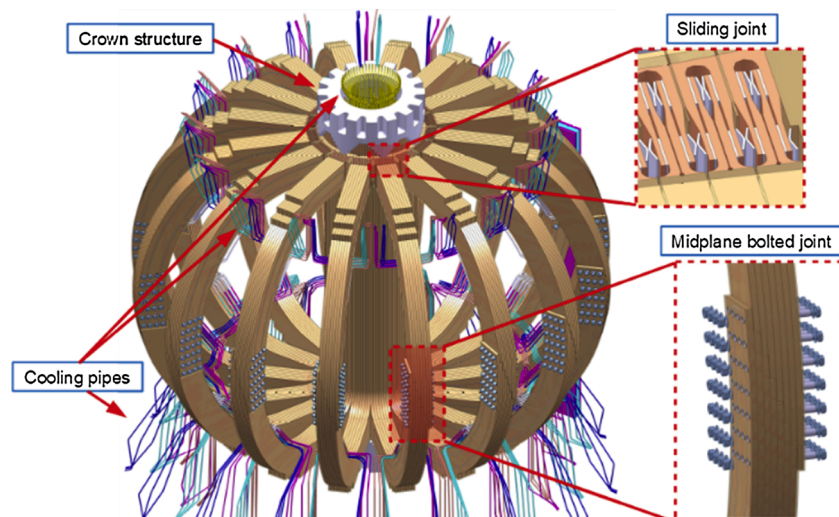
TF coils with detailed view of the sliding and bolted joint. The CS is not shown in this figure.
